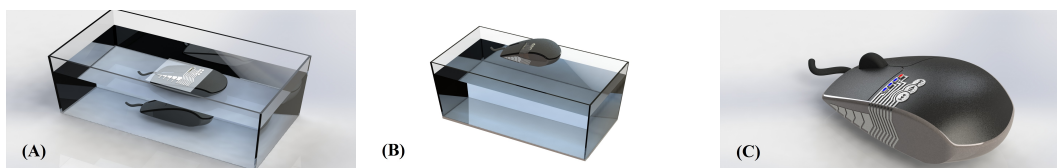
(A) Immersed 3D printed Mouse Piece with TTP film floating above, (B) 3D printed Mouse Piece grabbing the TTP film into its surface, (C) Final result.
